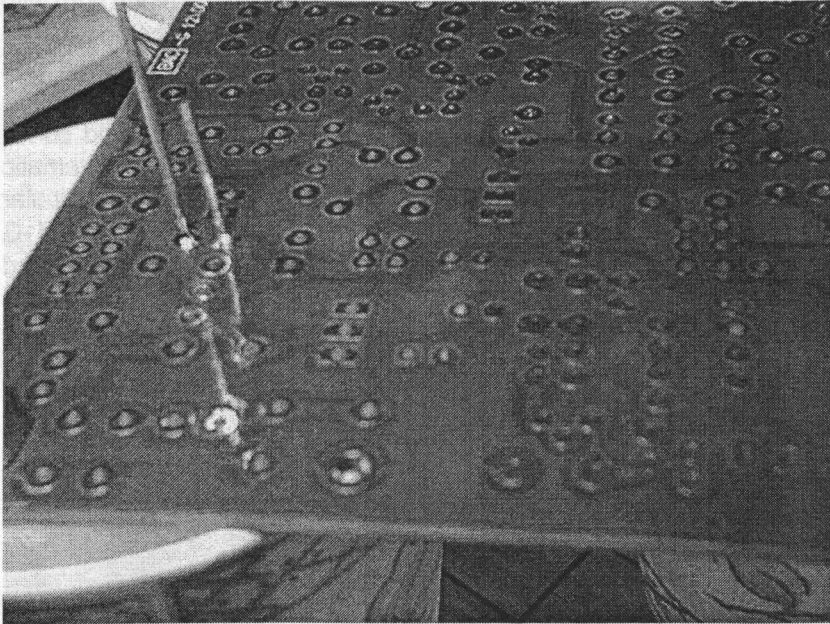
Diode D13 on the bottom side of the PC board just before soldering.
